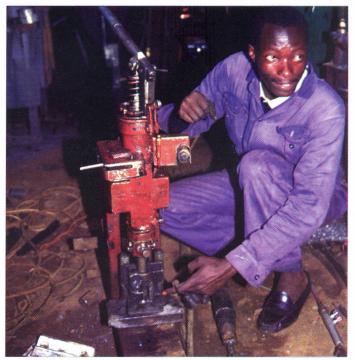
Kimani (Brother of Kamau, Embu) with his own design of machine to cut and shape the Butterfly
